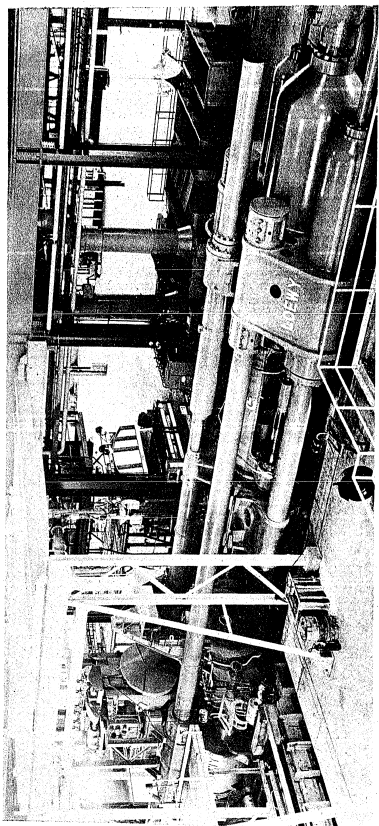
(A)-12,000 TON HORIZONTAL EXTRUSION PRESS
